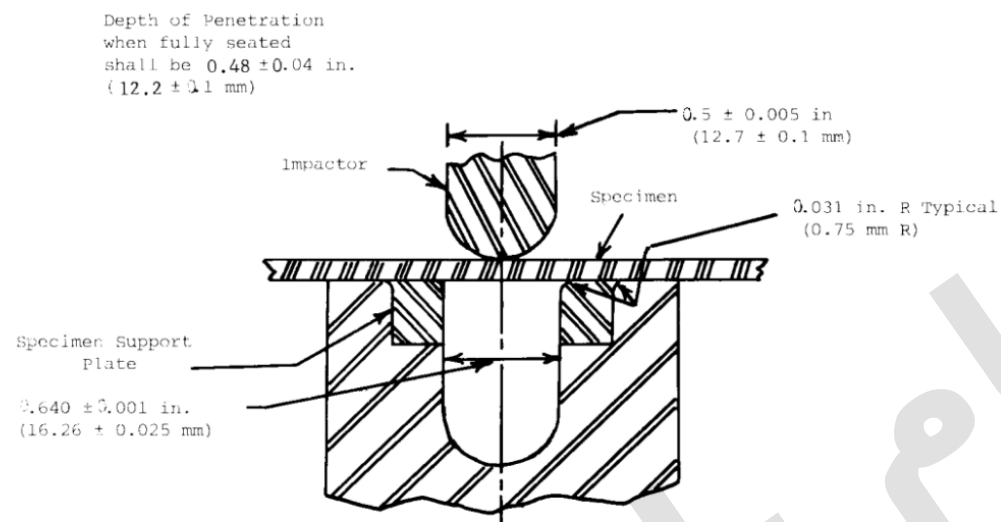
Impactor Head Configuration H.25 Specimen Support Detail
